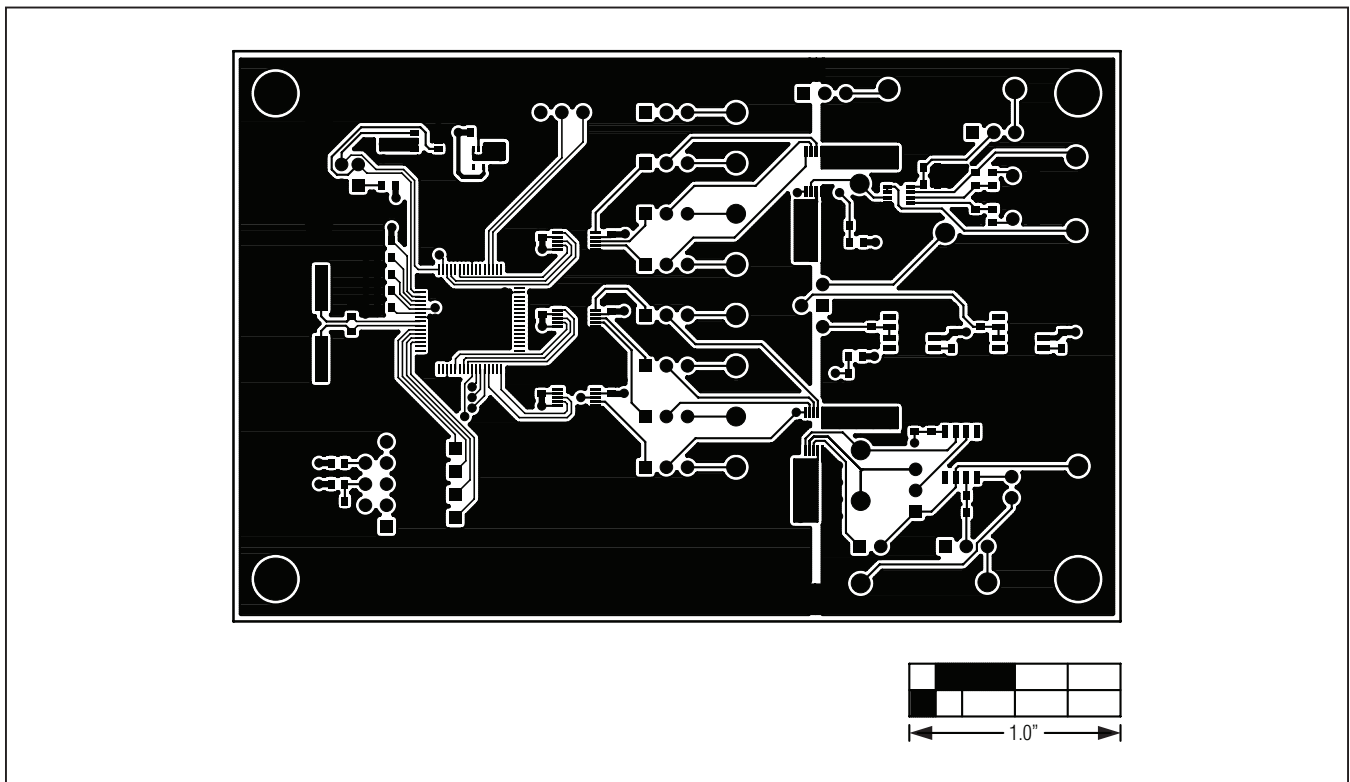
MAX544X EV Kit PCB Layout—Component Side
